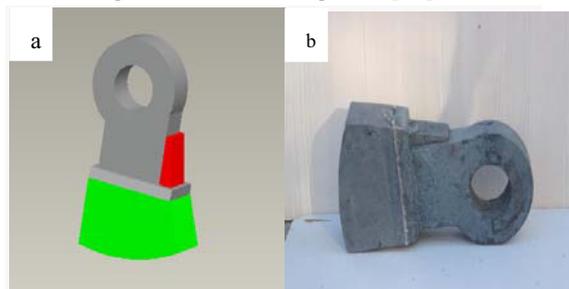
a) straight diagonal hammer handle piece of type b) Real figure
